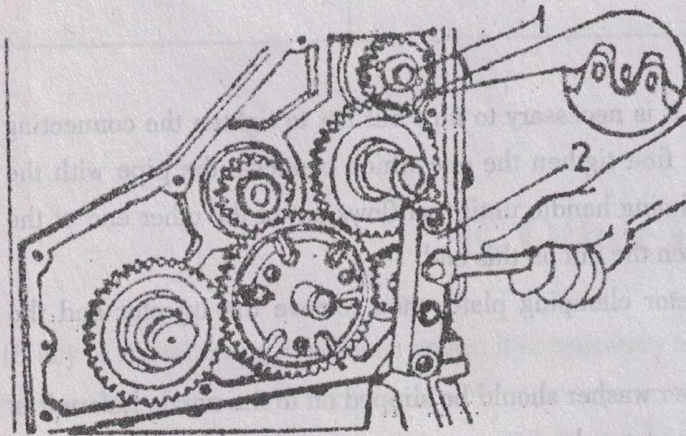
Arrangement of gear train (tooth-mesh-marks must be lined up) and dismantling of balancing shaft gear by means of a puller
